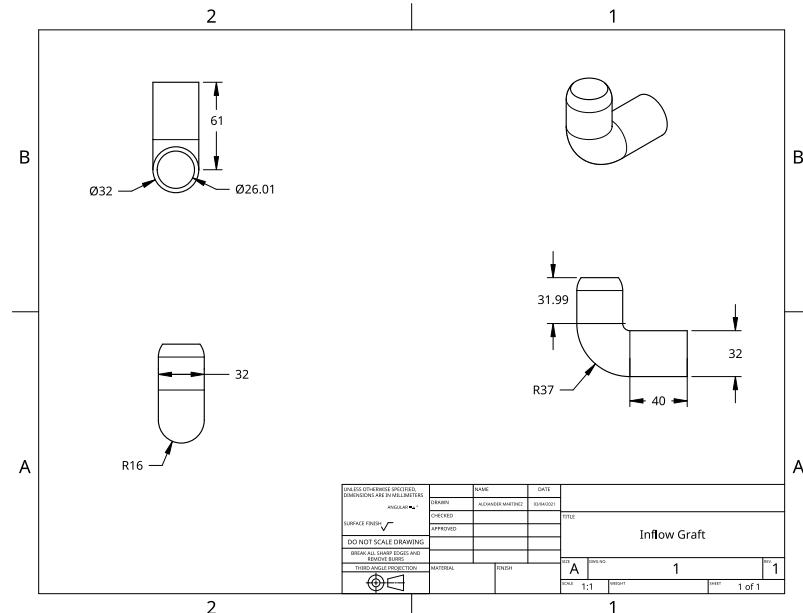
HEART PUMP MANUFACTURING SHEET
